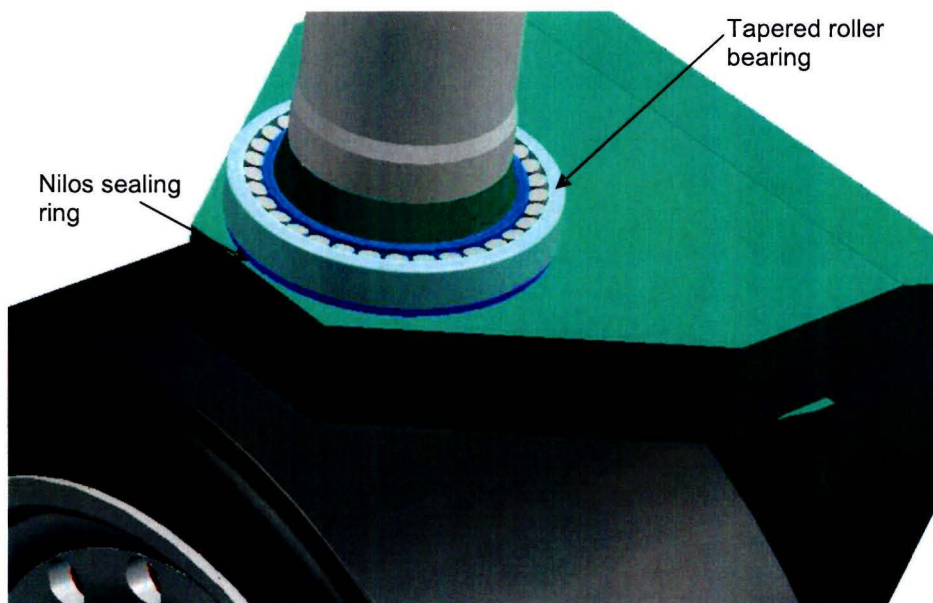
Nilos ring (purple) and a tapered roller bearing mounted to the wheel carrying arm
